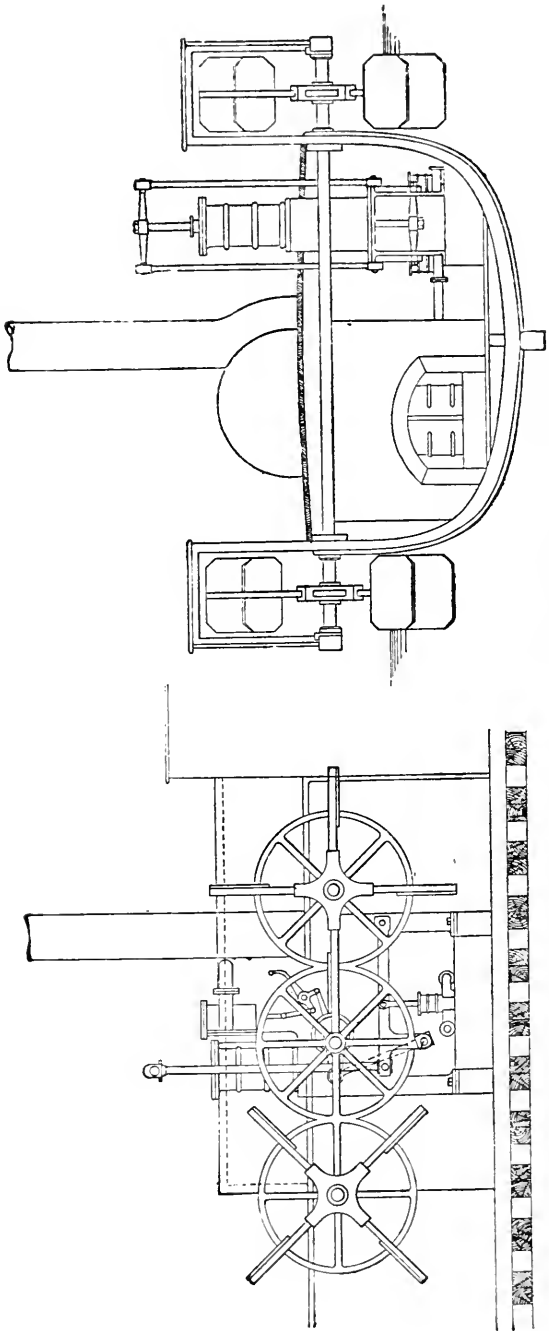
Machinery and Wheels of Paddle Steamer "Comet," 1812.
